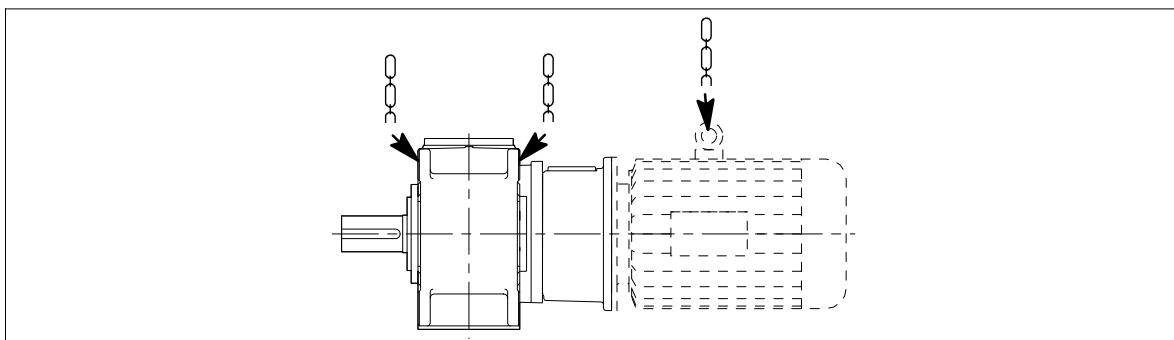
Attachment points on gear units with motor of types H4.. up to size 514 and H2.., H3.. of sizes 513 and 514
